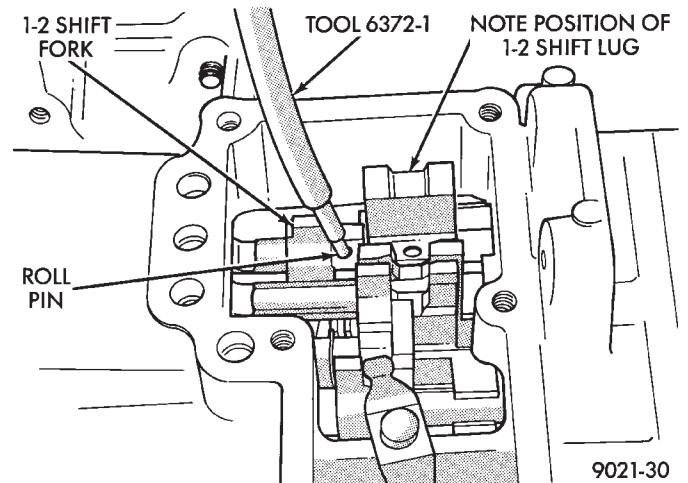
Remove 1-2 shift Lug Roll Pin
